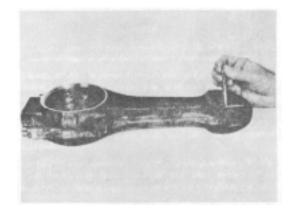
C-26. Check the Piston Pin Bushing in the Rod
